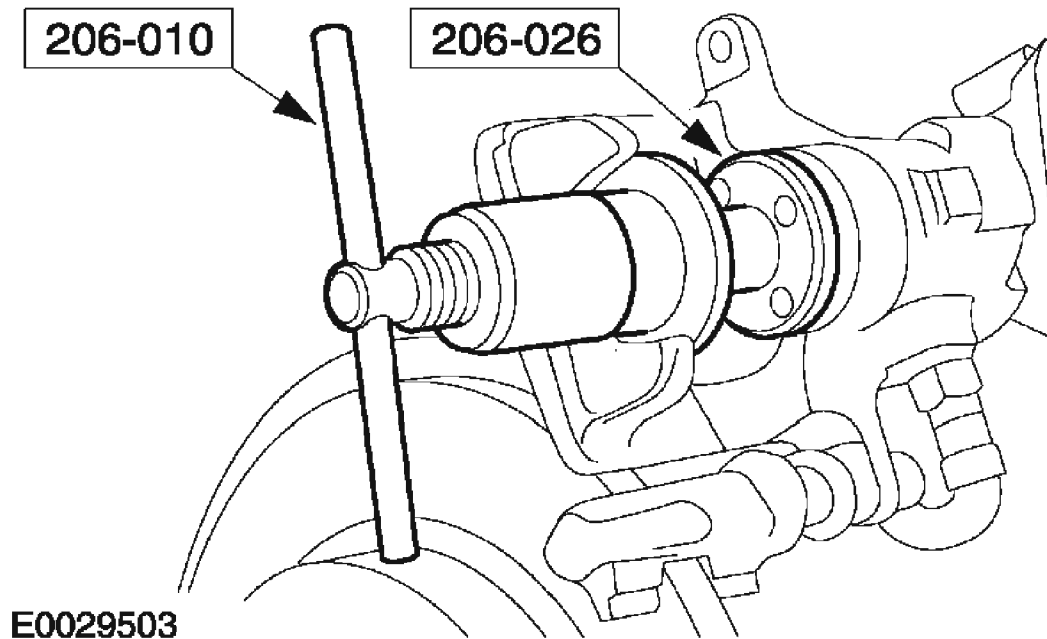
Using Special Tool To Retract Brake Caliper Piston
